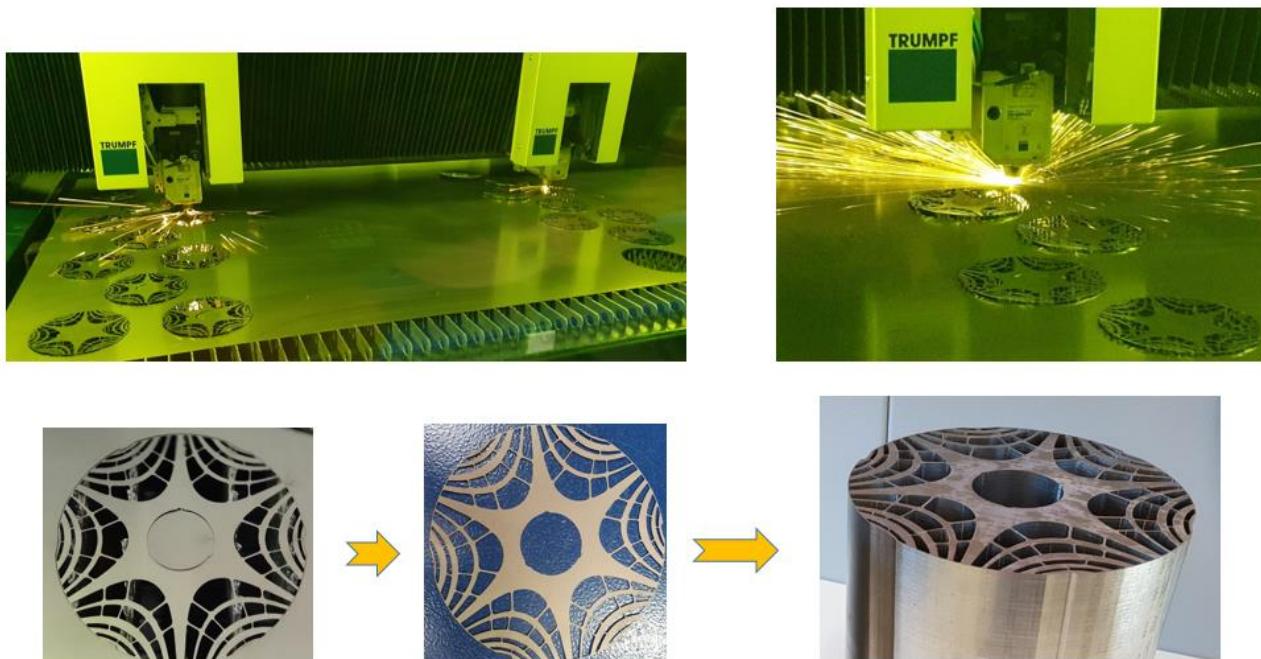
Laser cut for the rotor cores of Pure SynRel motor (Courtesy by LCD)
